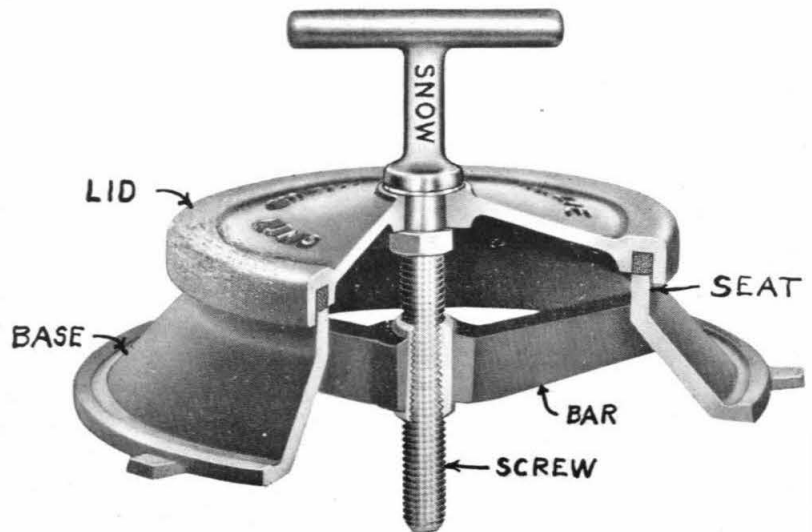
TYPICAL VALVE FOR REGULATING FLOW FROM IRRIGATION RISER. THE RUBBER GASKET OF THE METER SEATS ON TOP OF THE SLOPING SHOULDER OF THE VALVE BASE.
